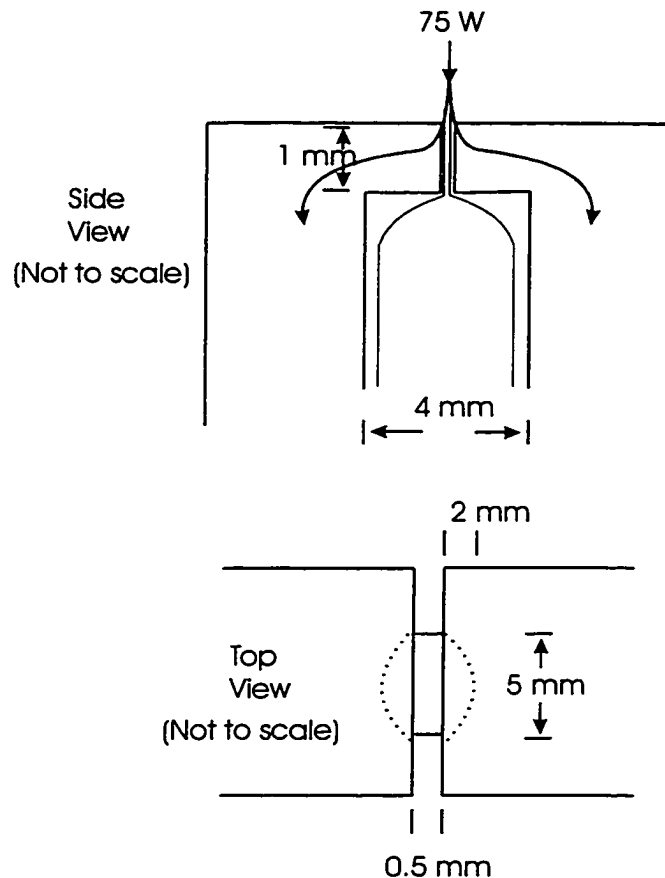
Sketch of heat sink block design showing the direction of heat flow during the welding step (not to scale).
